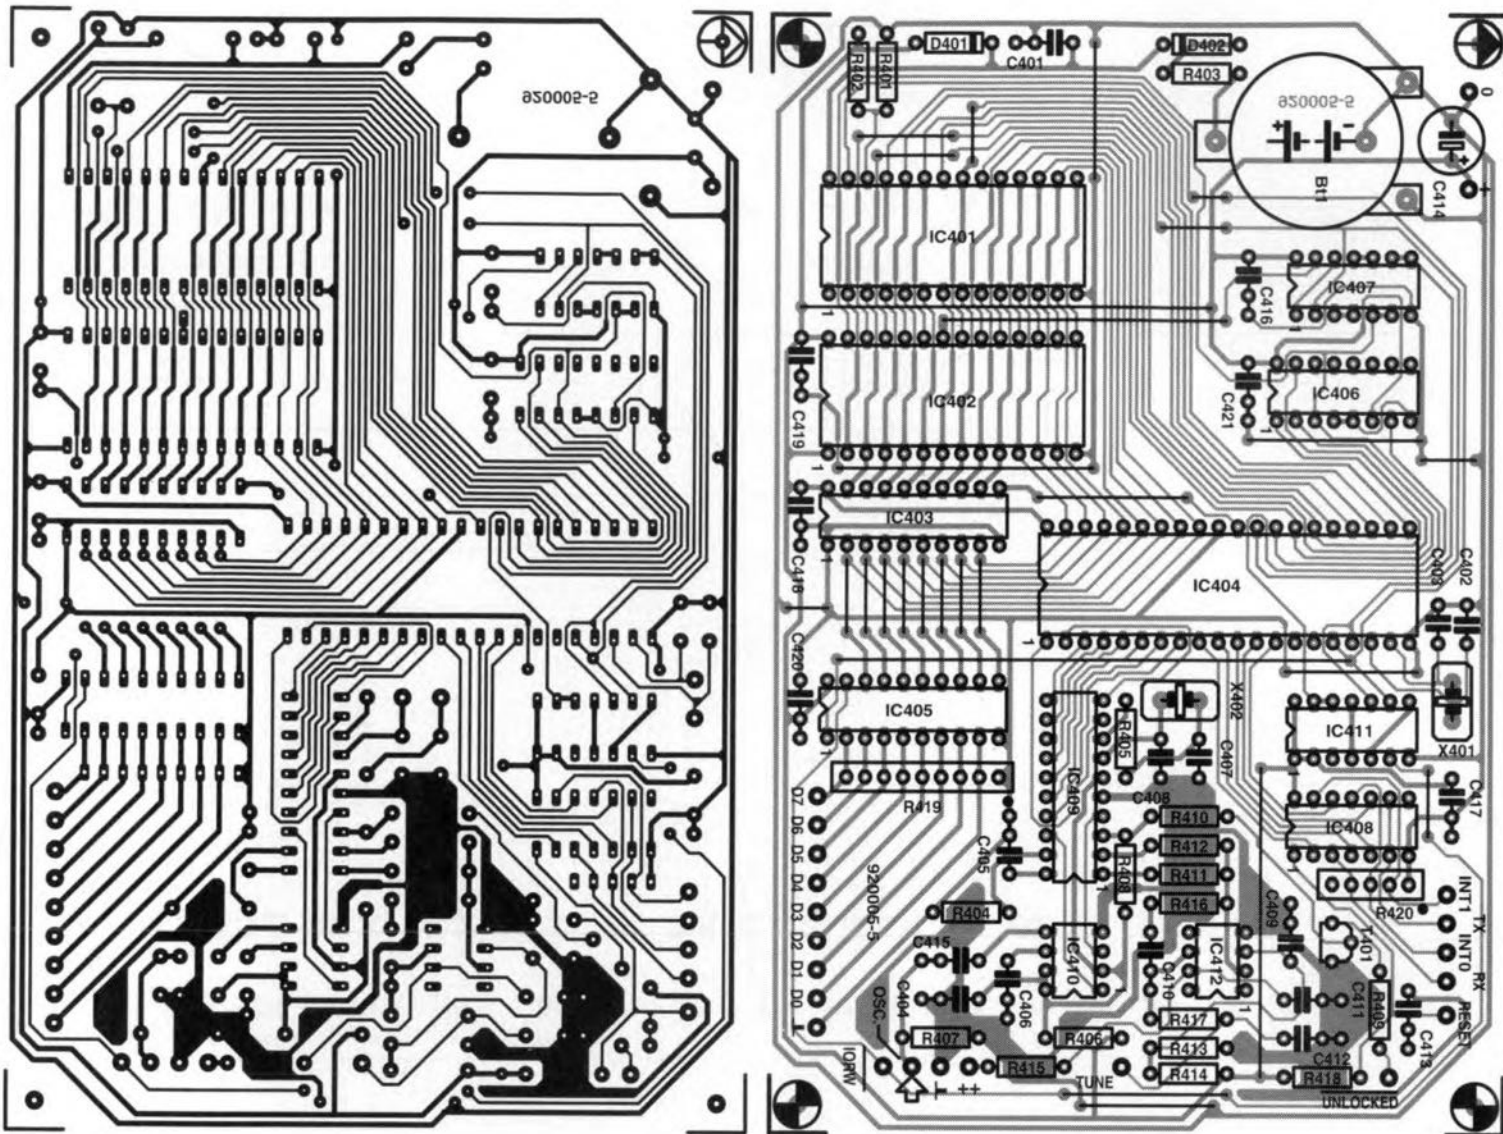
Track layout (mirror image) and component mounting plan of the synthesizer board.
